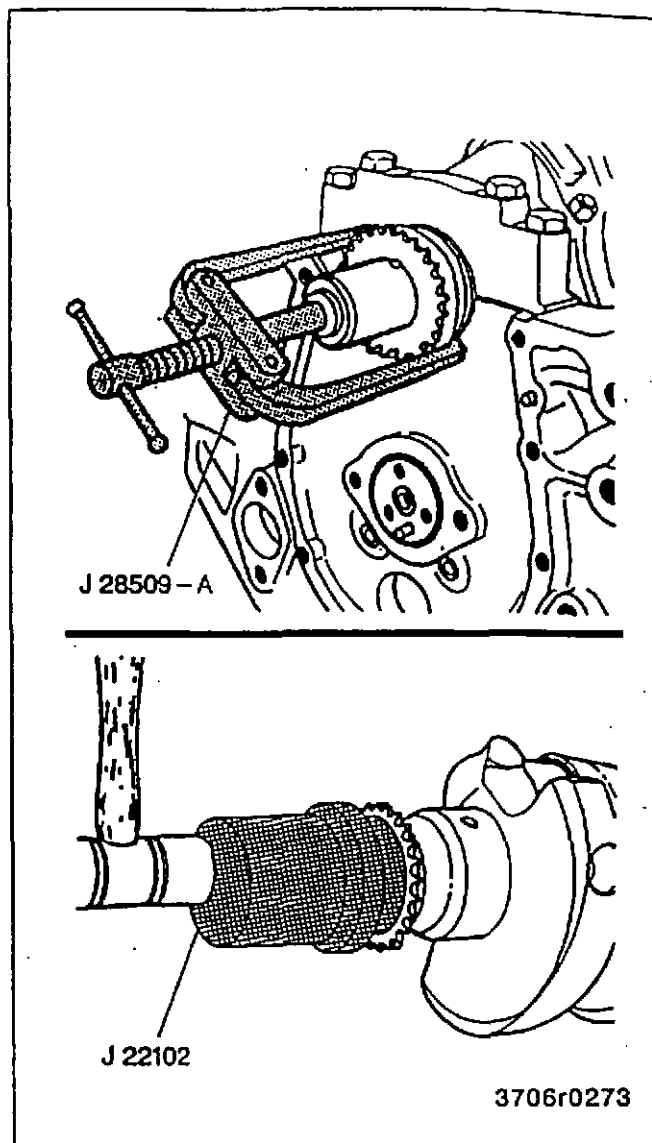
Crankshaft Sprocket Replacement (7.4L Engines)
